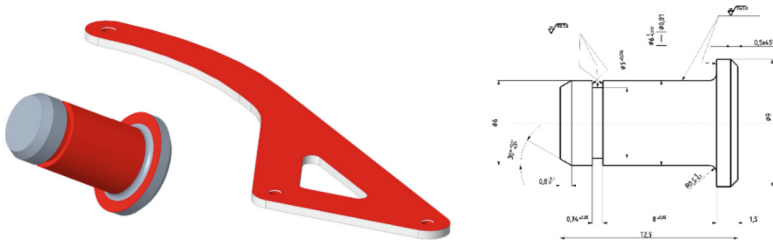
Pin and arm 3D parts of the crusher with functional surfaces highlighted (left) and detailed drawing of the crusher pin (right).
